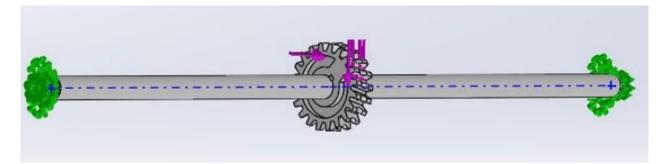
Boundary condition applied to the shaft 3, worm gear and the key.
